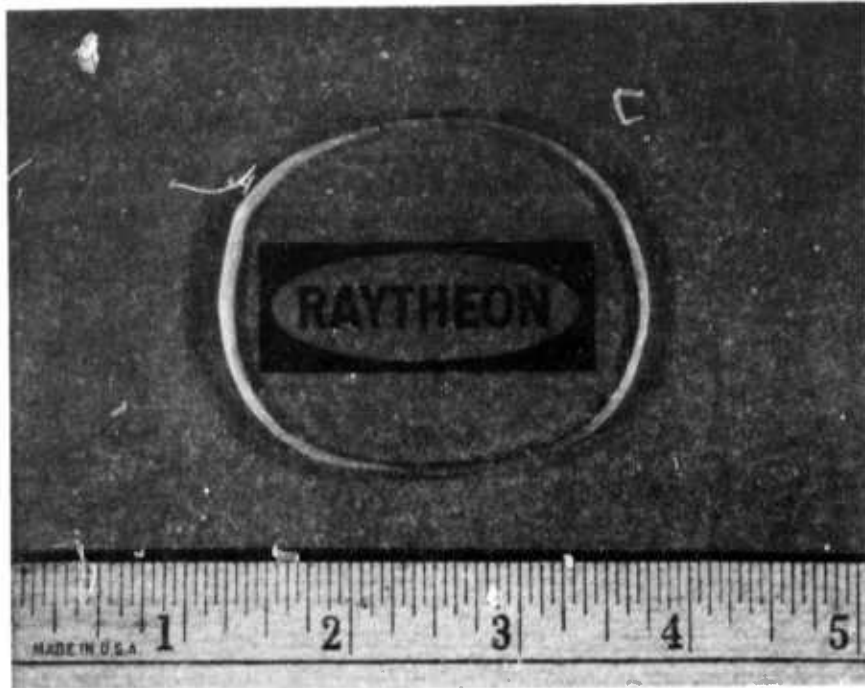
CaF_2 Single Crystal Hot Forging. Sample VHP-154.
